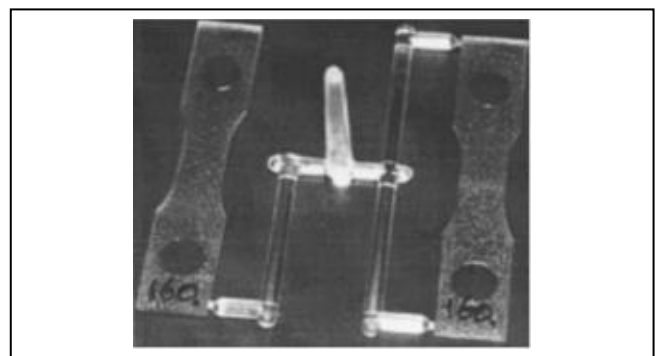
Single gated and weld line specimens according to ISO 8256
